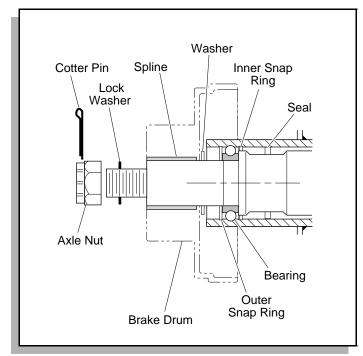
Cut Away of Outer Bearing and Brake Drum
